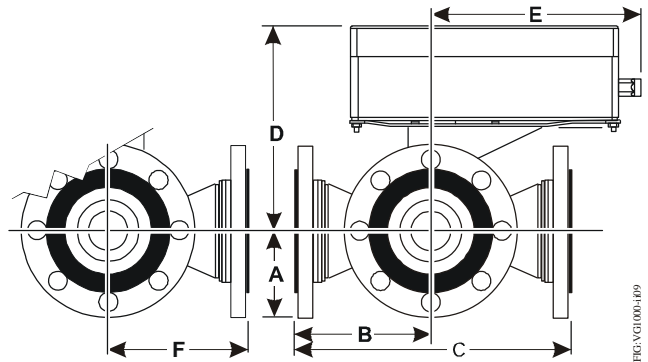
Actuated VG12A5xx Two-Way Series Ball Valves with M9000-330 Weathershield Dimensions, in. (mm)
